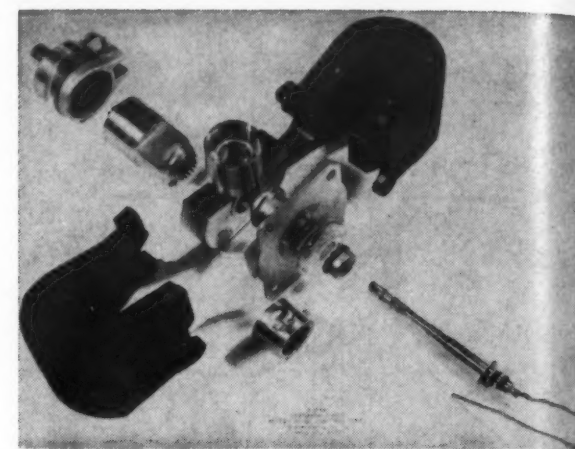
EXPLODED VIEW of Magnetron WL-6249A, showing cathode assembly. Arrow points to cathode cermet.
